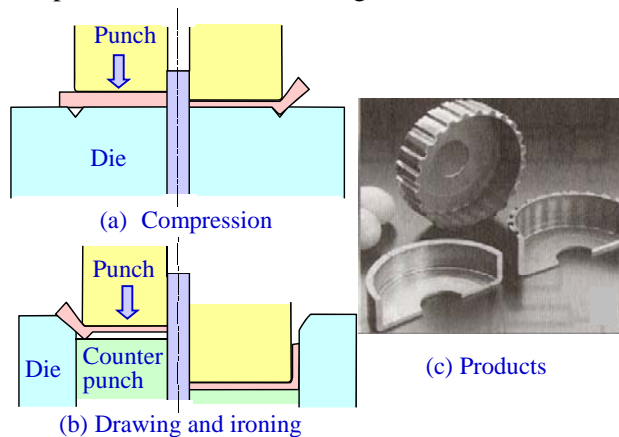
Forming of gear drum having sharp bottom corner [6].
